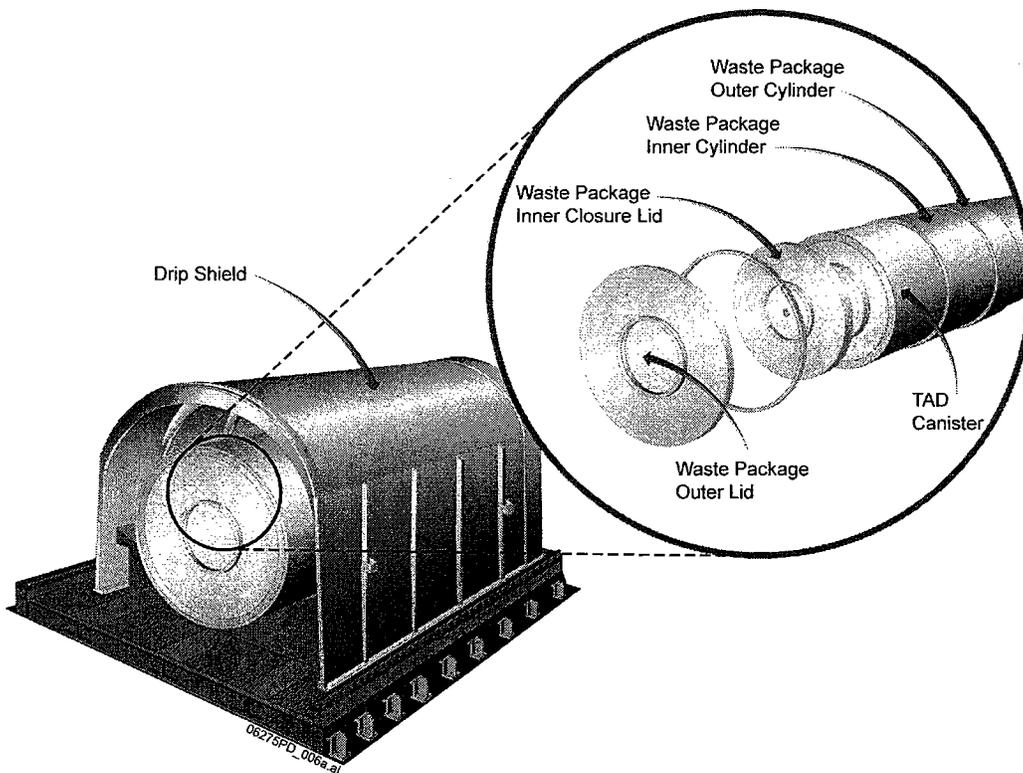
Schematic of TAD Canister Shown Placed inside Waste Package
